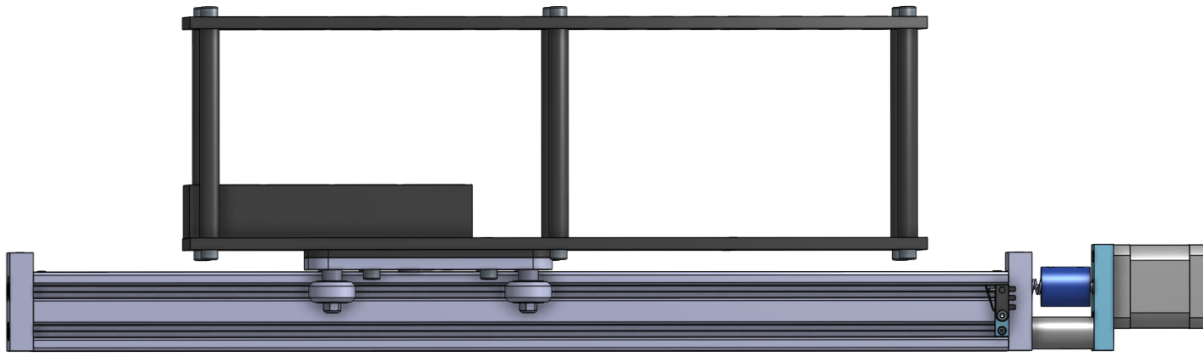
Side View of the Fraction Collector with a Tube Rack and Spacer.
